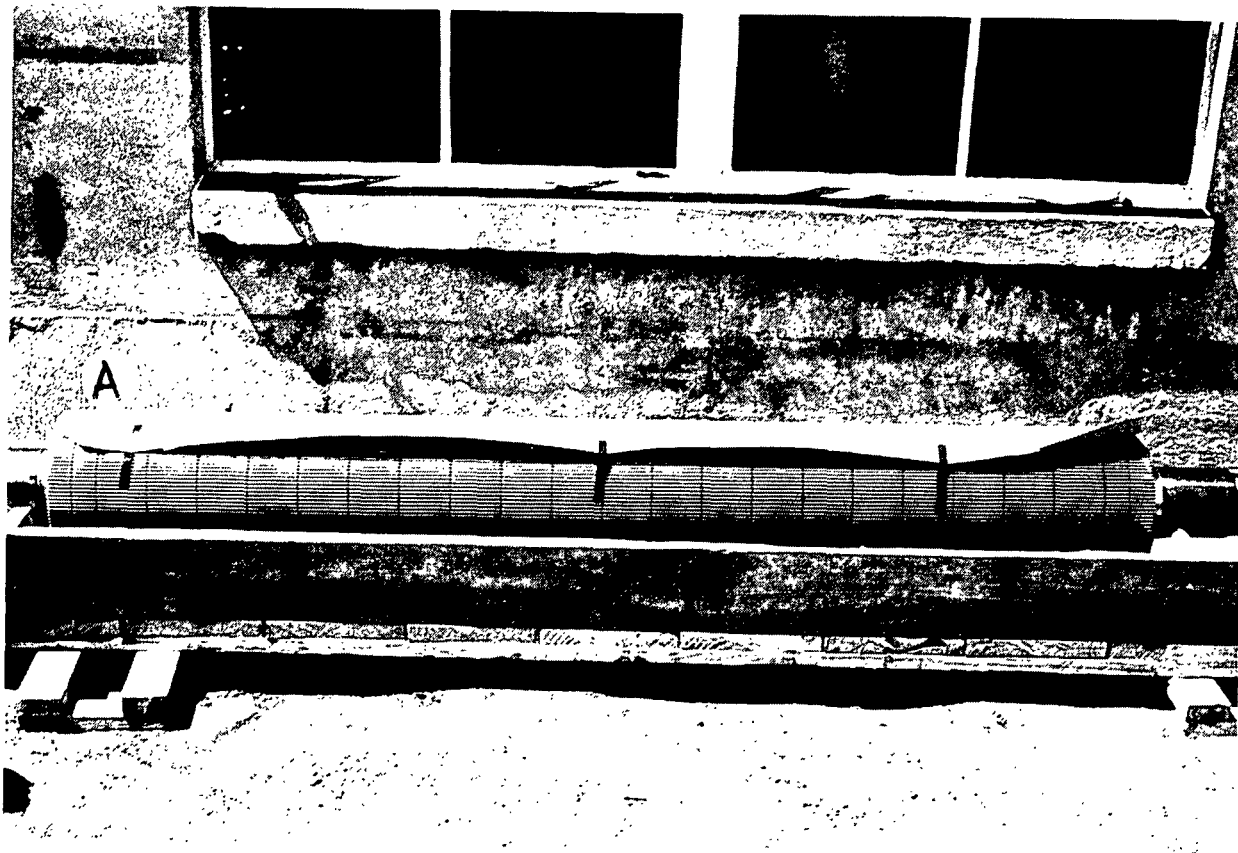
Photograph of Worn Upper Corrugating Roll as Received. The End Marked "A" was Cut From the Roll for Closer Inspection
